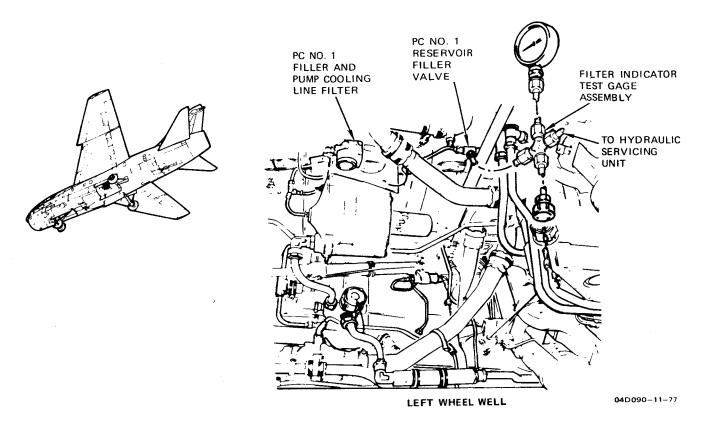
E. PC No. 1 Filler and Pump Cooling Line Filter Differential Pressure Indicator Test Connections
